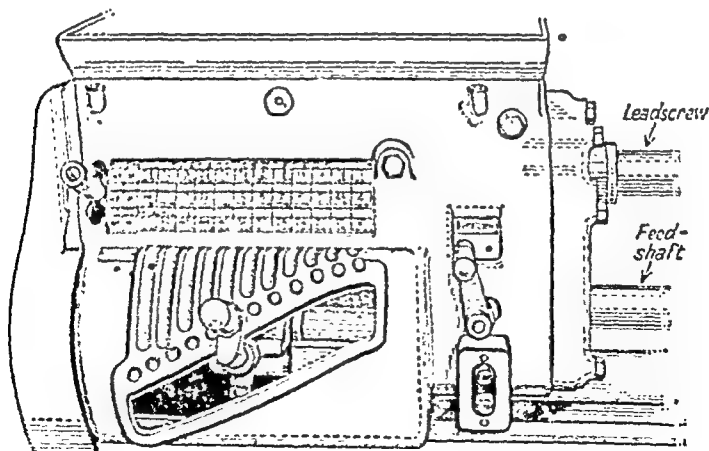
Quick Change Gear-box for obtaining Feeds and Threads.
